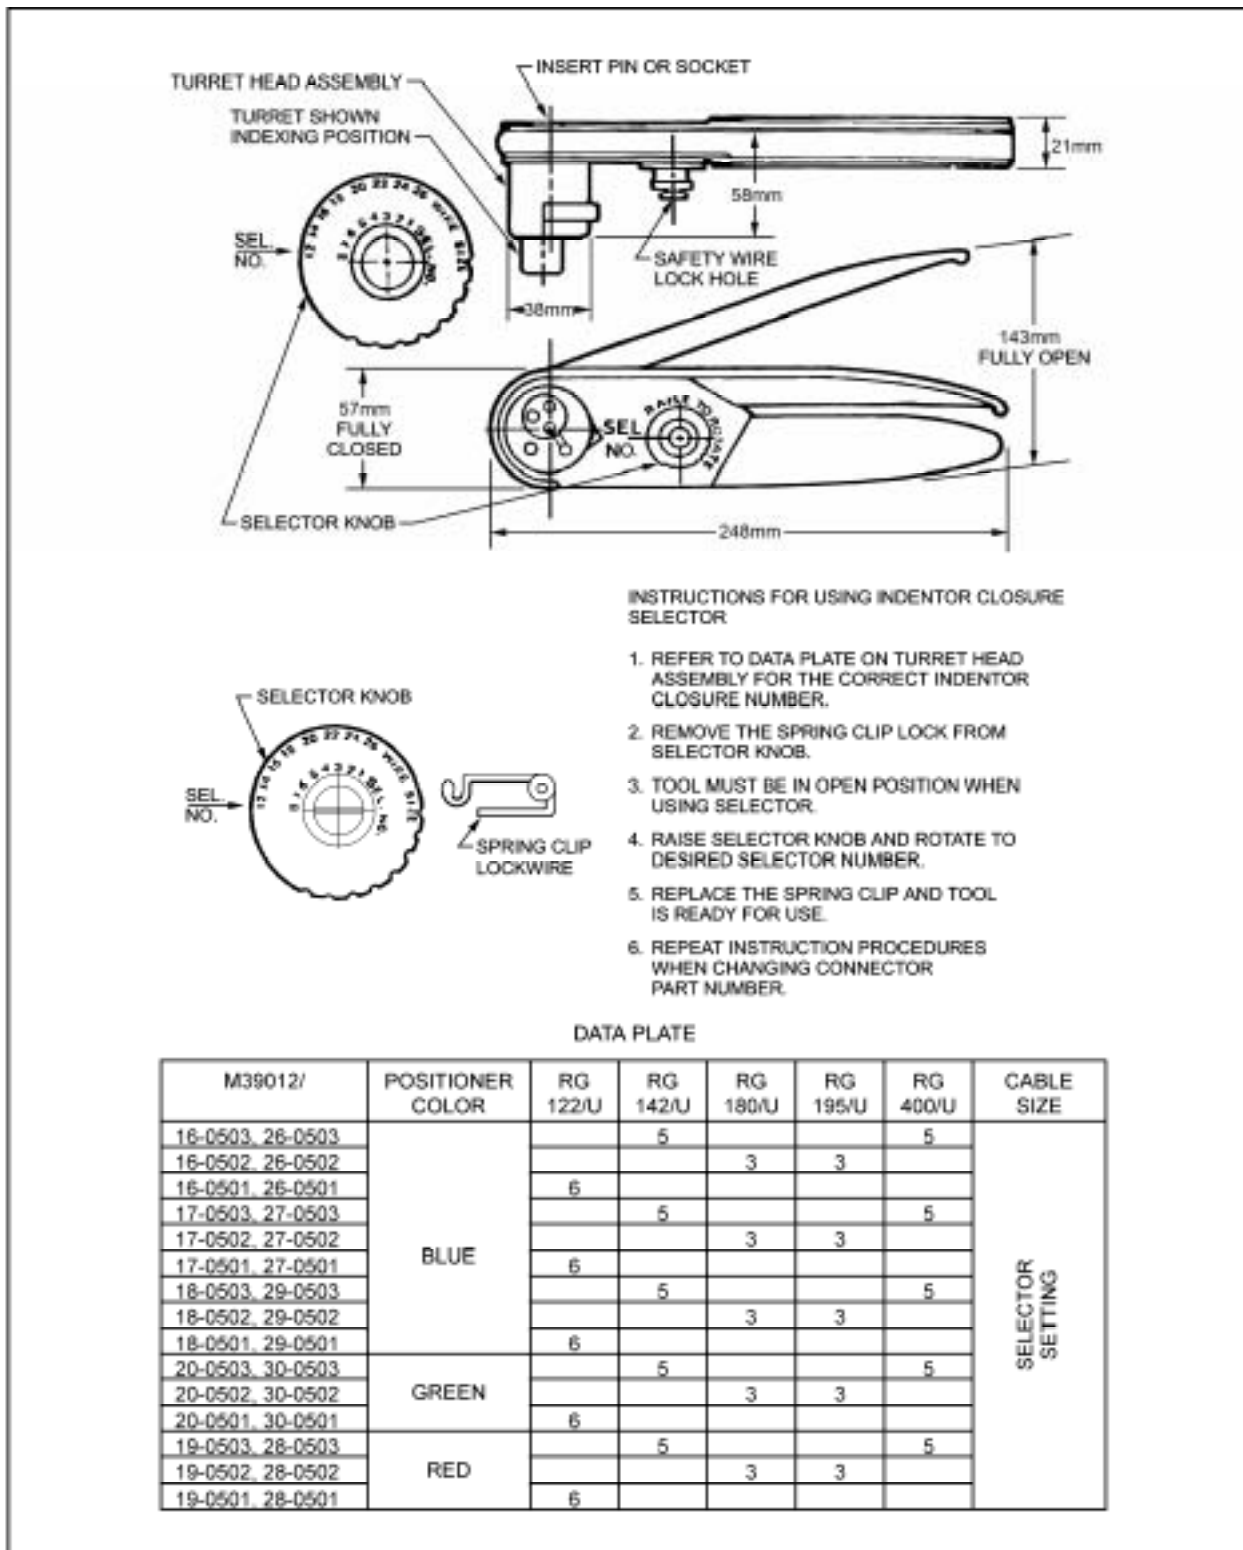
M22520/1-01 Crimping Tool and Turret
